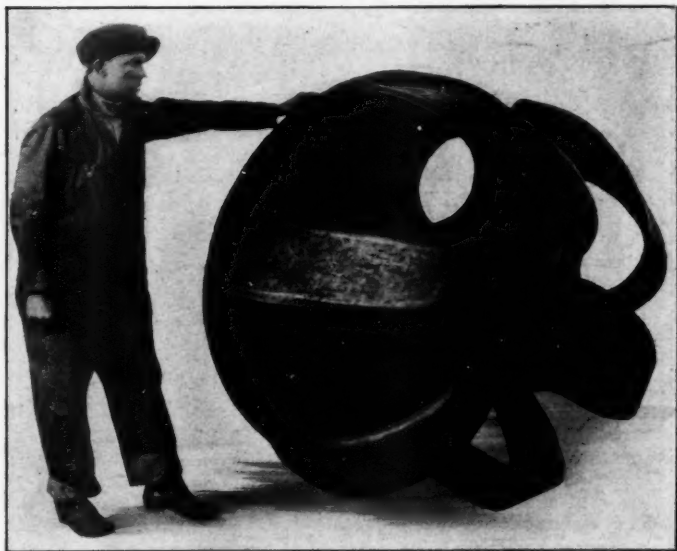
LARGE MANGANESE STEEL CUTTER HEAD
